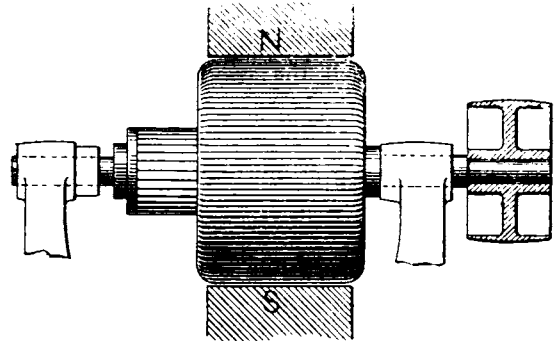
ARMATURE FORCED AGAINST BEARING.
